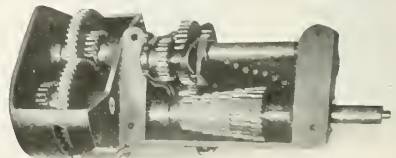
Arrangement of Gearing in Quick-change Gear-box
